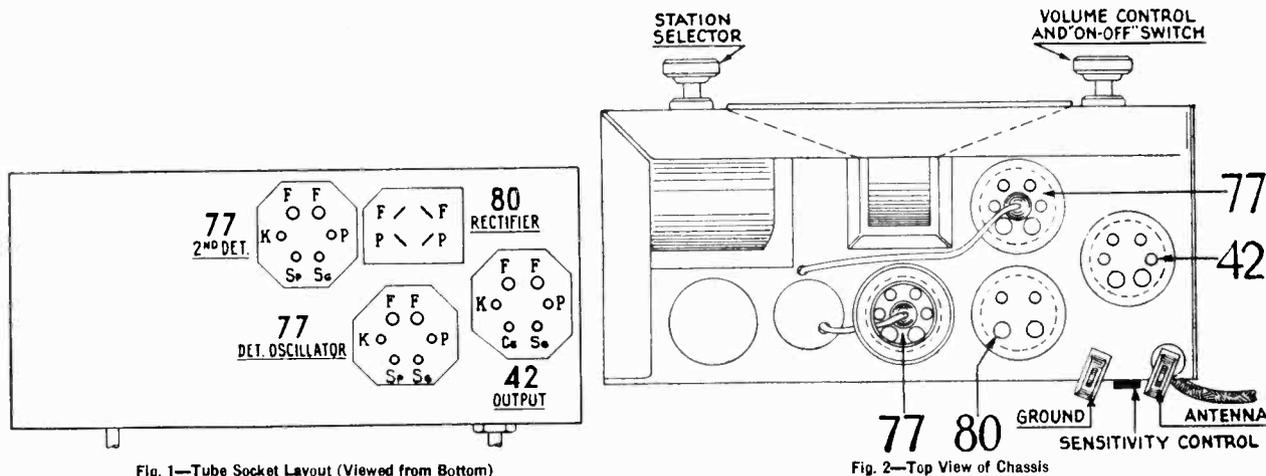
Tube Socket Layout (Viewed from Bottom)
